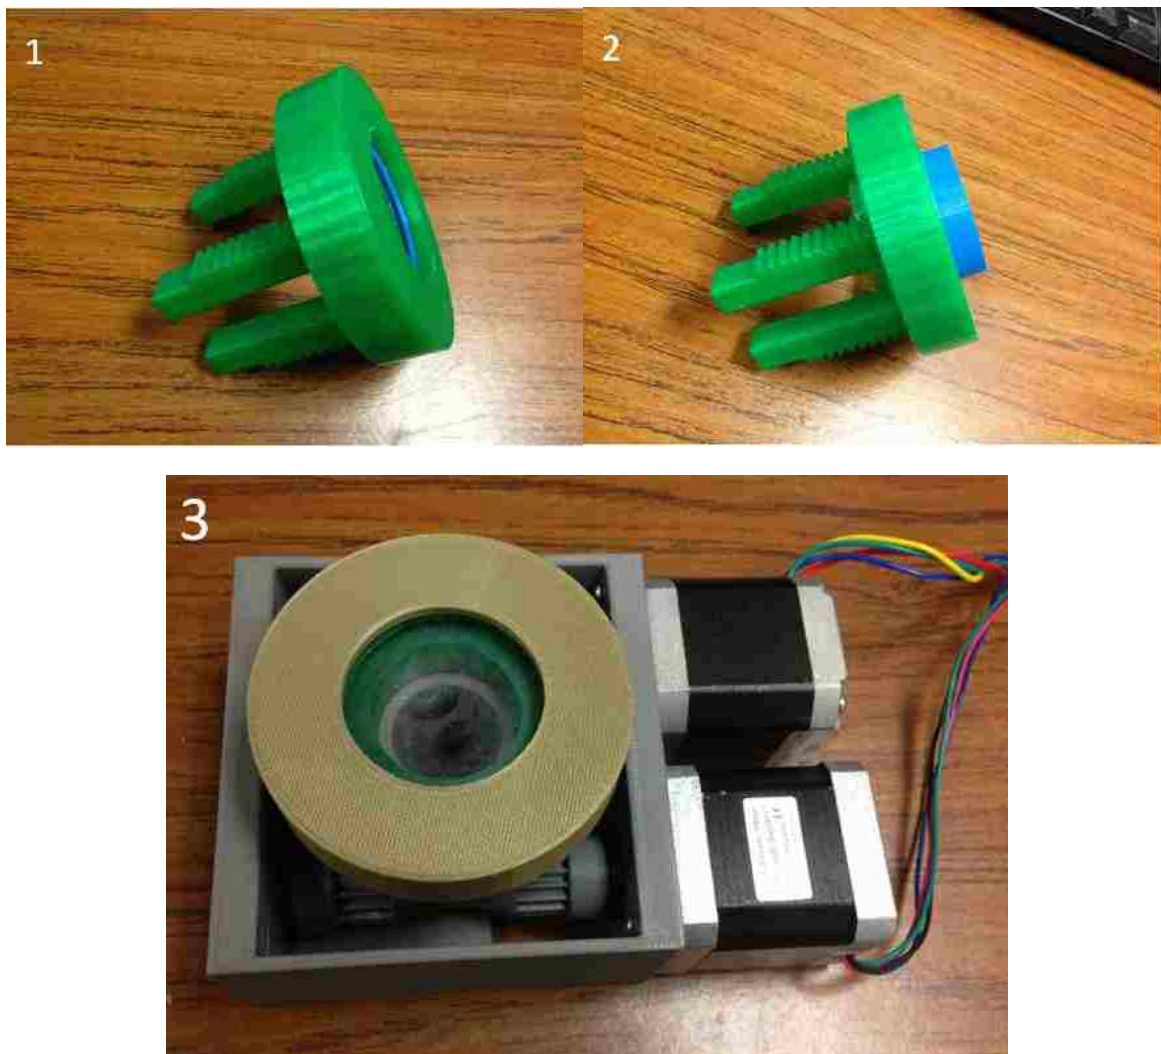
The image of the final design: 1.Assembly of working part for the inverted microscope; 2.Assembly of working part for the regular microscope; 3.The entire membrane stretching device
